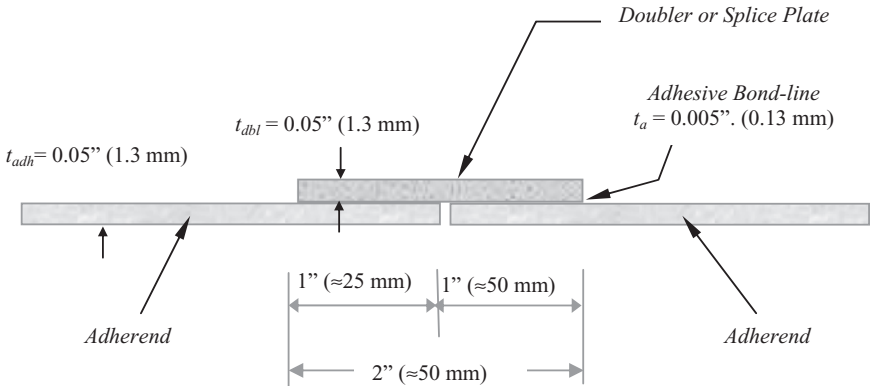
Geometrical details of the bonded single-doubler (single-strap) butt joint of Example 5-1.
